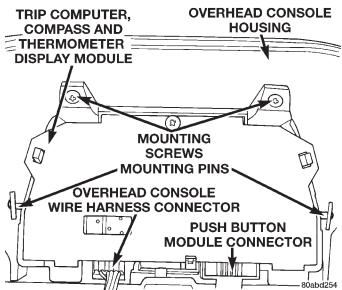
Trip Computer, Compass, and Thermometer Display Module Remove/Install
